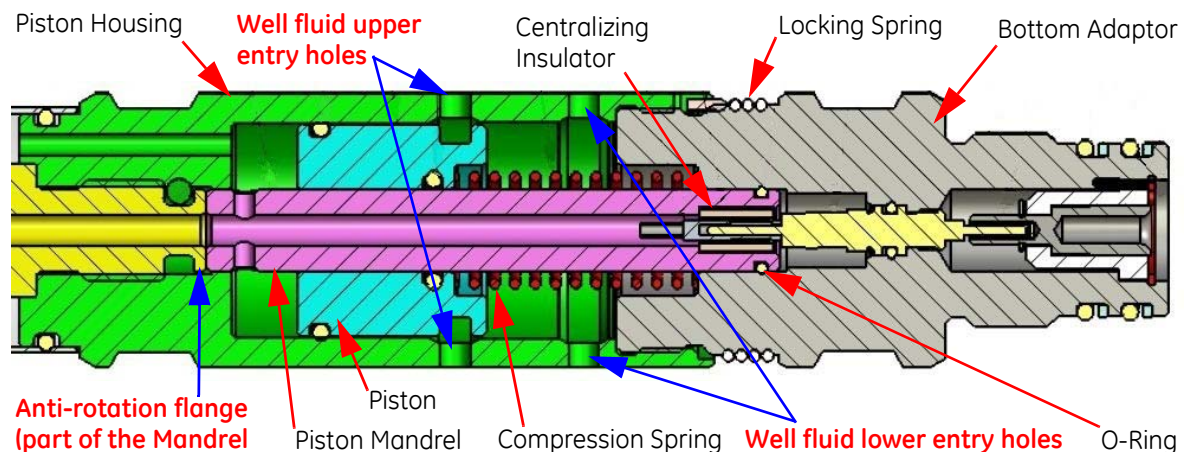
Identification of components in the assembly of the Piston Housing and the Bottom Adaptor
